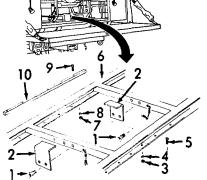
Generator Track and Holddown Assembly, Removal.
